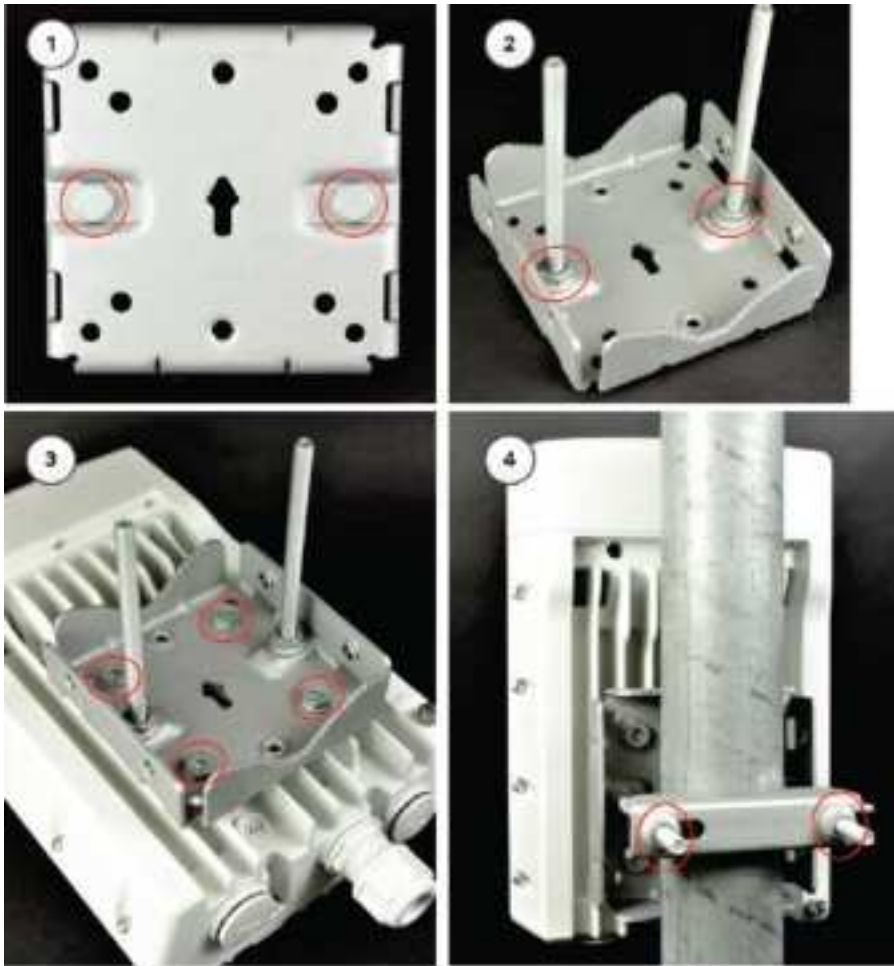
Fixing the mounting plate of bracket body and adjusting the elevation angle
